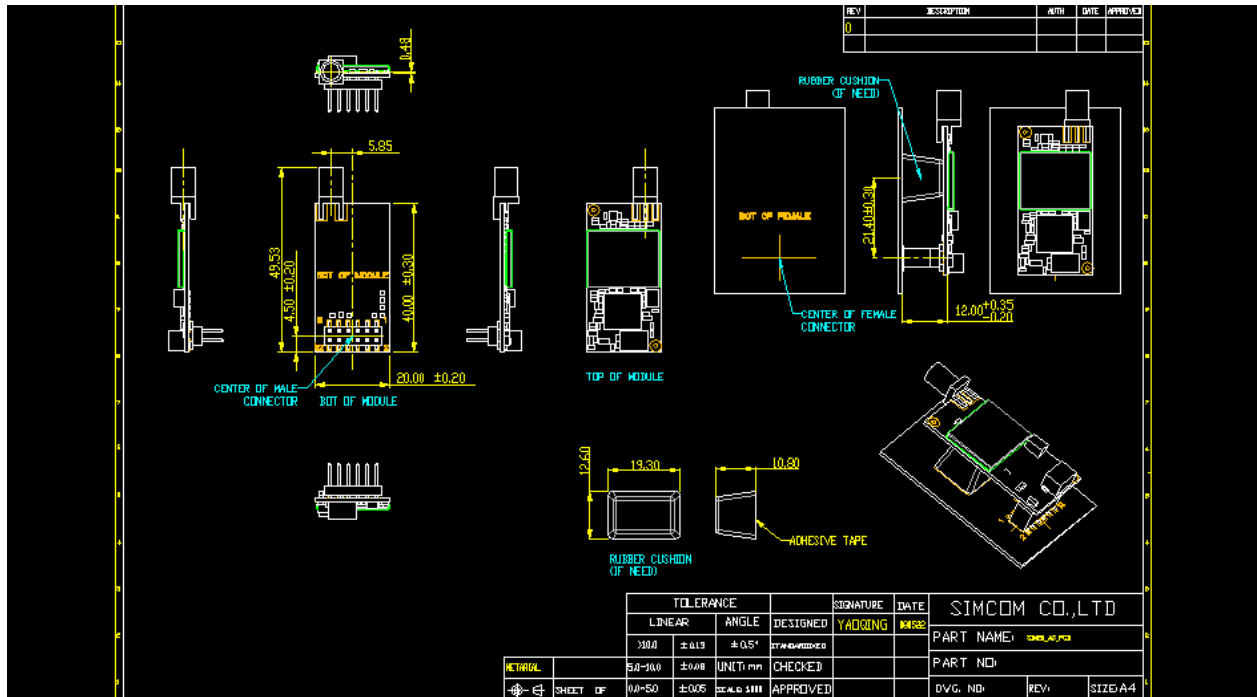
Mechanical dimensions of SIM20 (Unit: mm)
